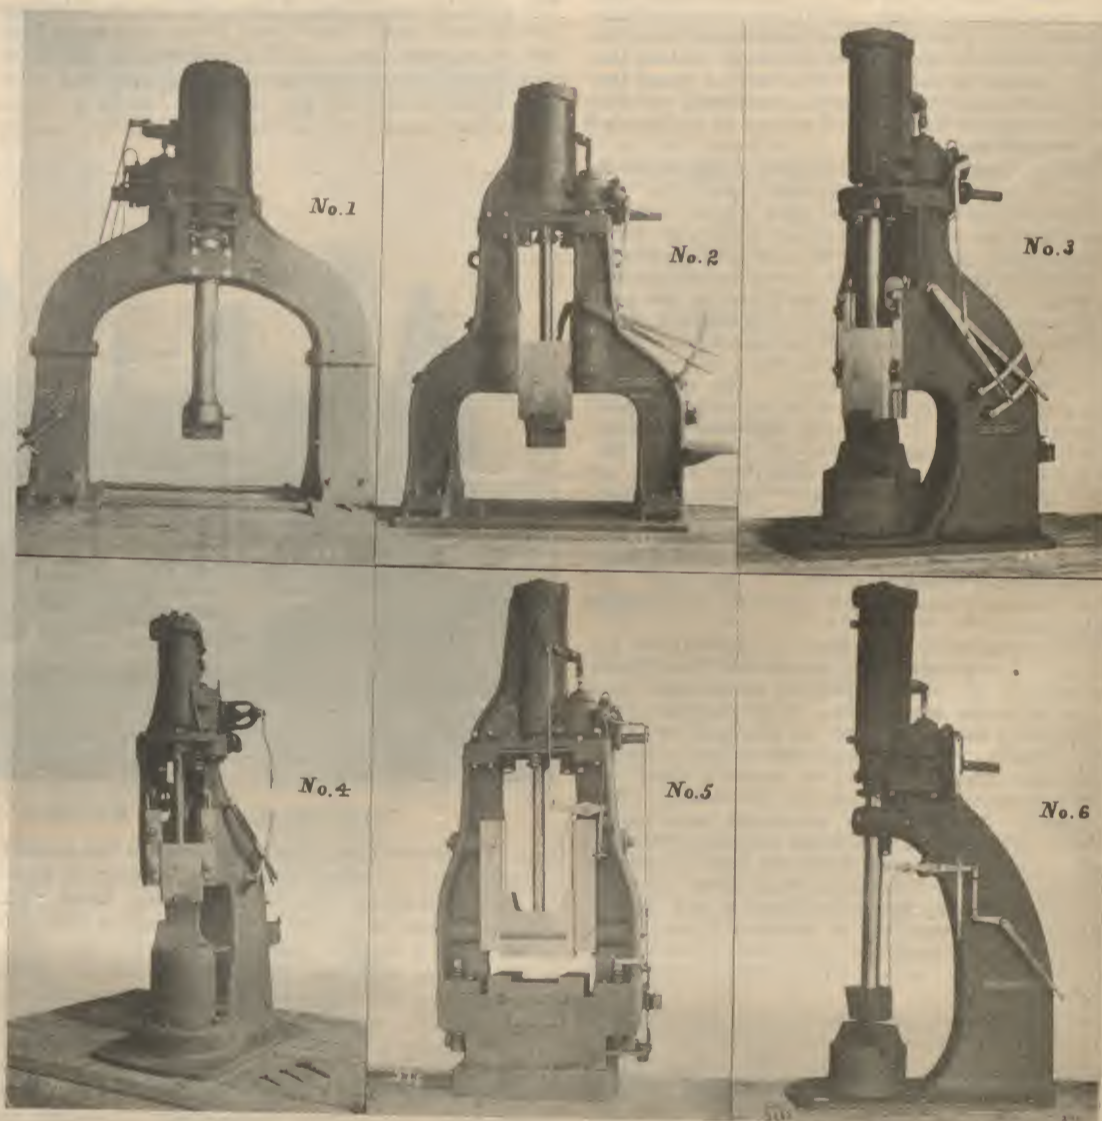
STEAM HAMMERS BY BEMENT, MILES & CO.
